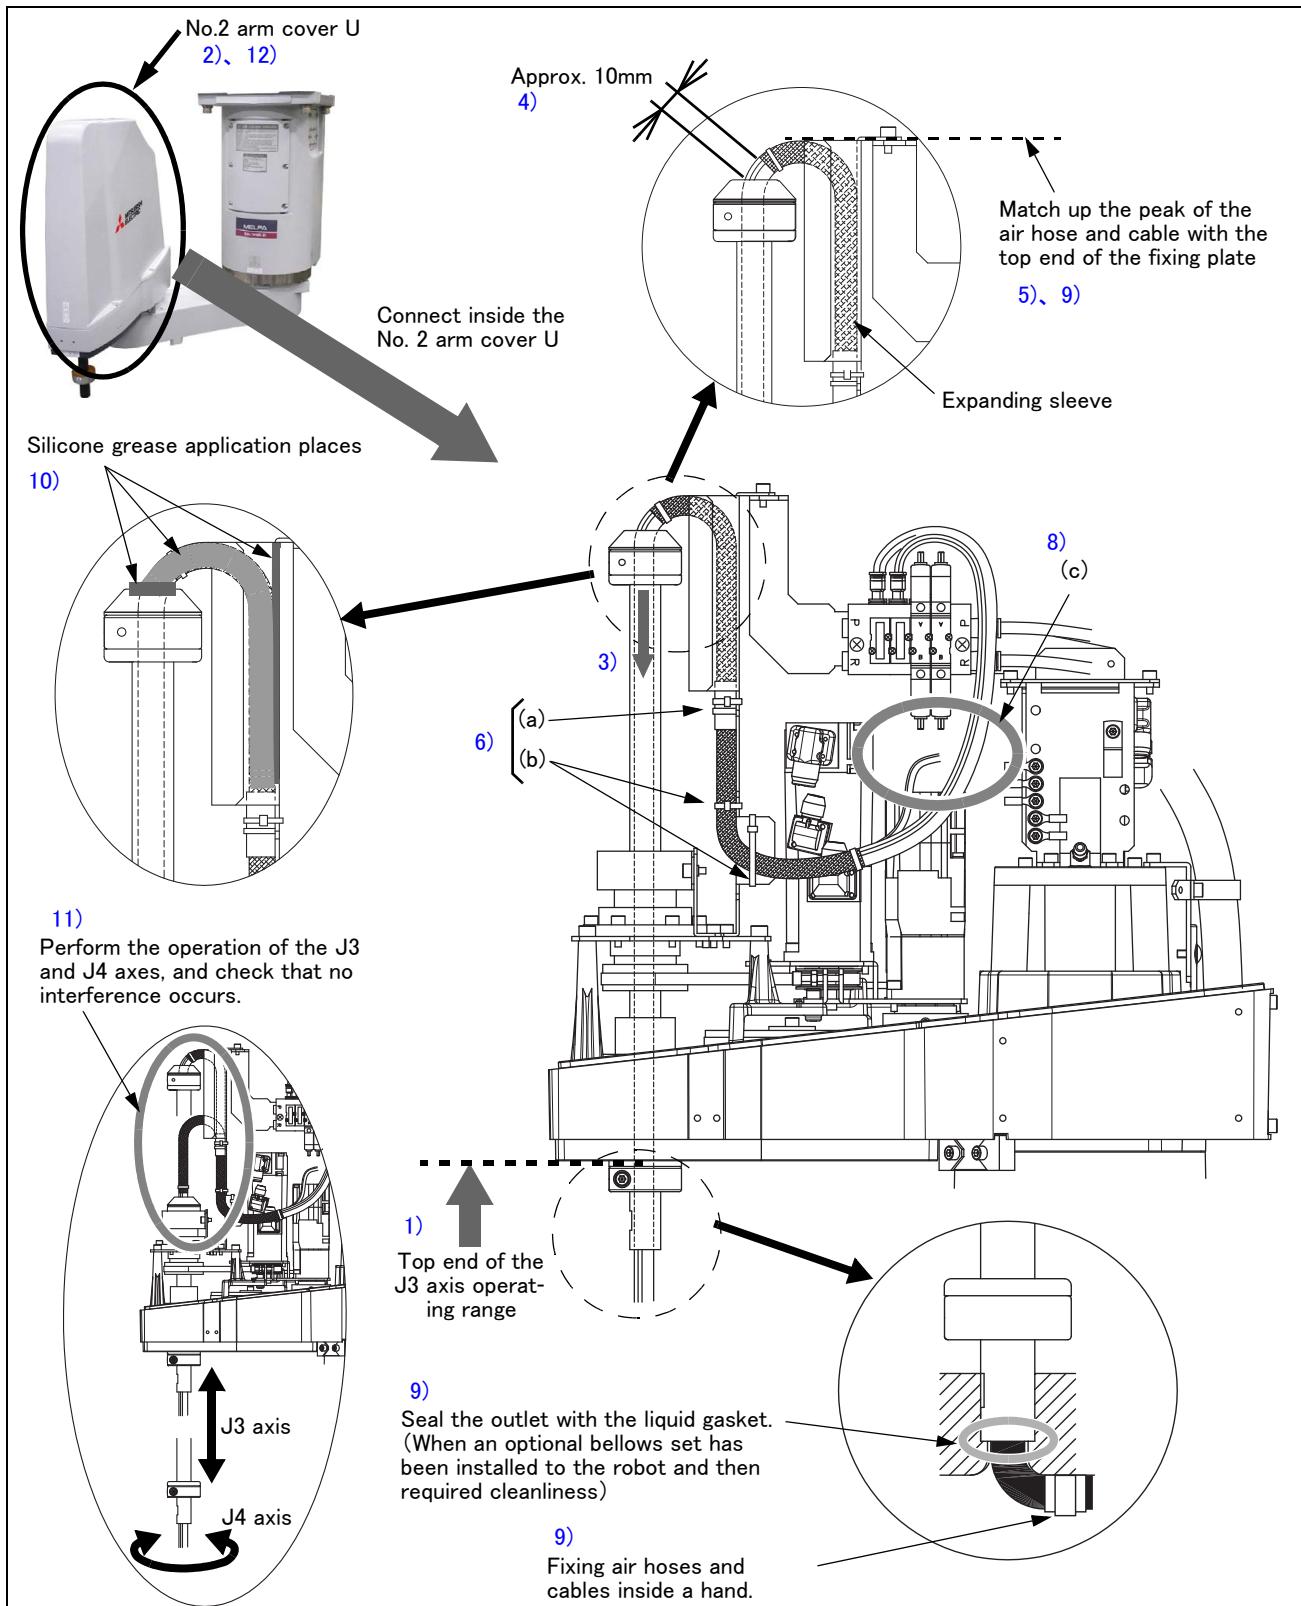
Installation of air hoses and cables inside the robot's shaft
